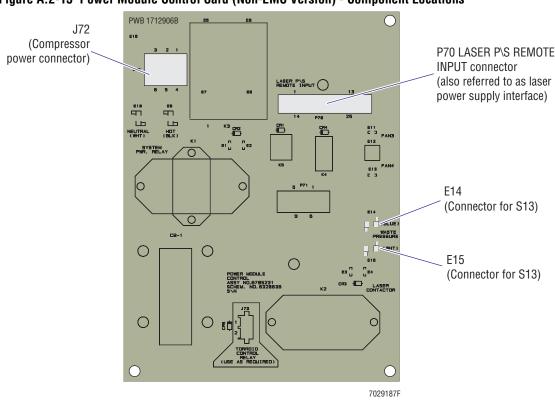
Power Module Control Card (Non-EMC Version) - Component Locations
